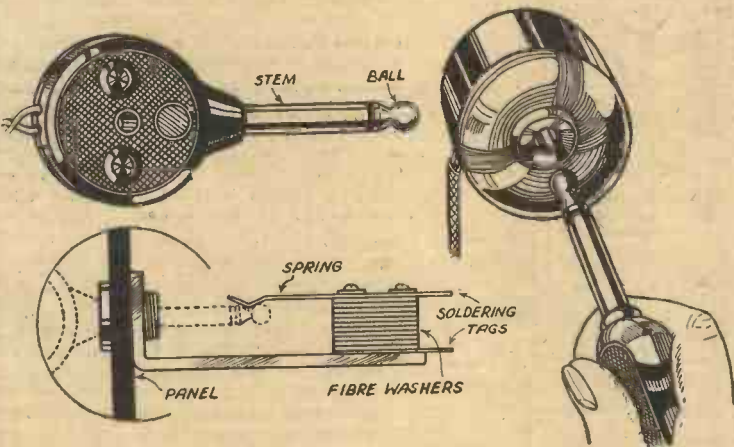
Plugs and jacks, showing how the tip and stem of the plug makes contact.
